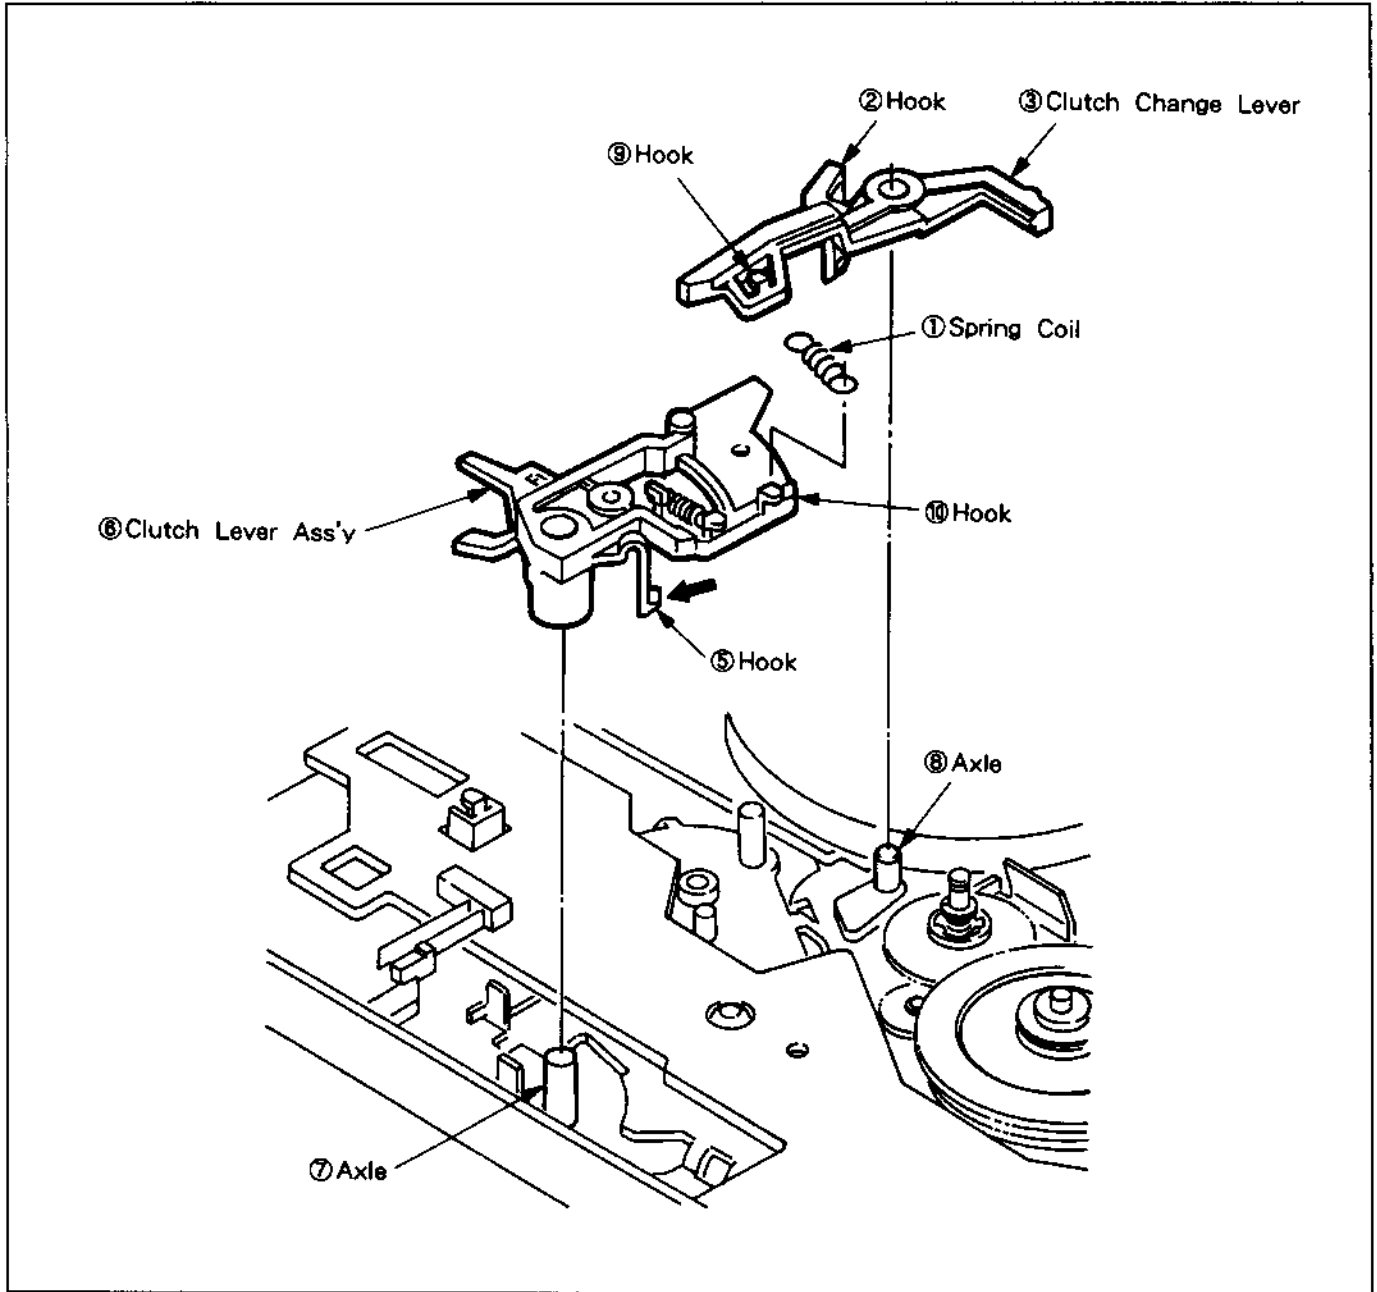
Clutch Change Lever & Clutch Lever Ass'y
